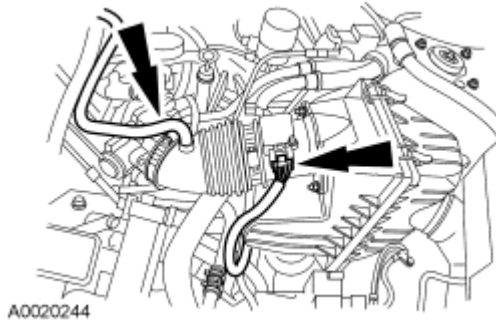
Locating Breather Tube & Mass Air Flow (MAF) Sensor
